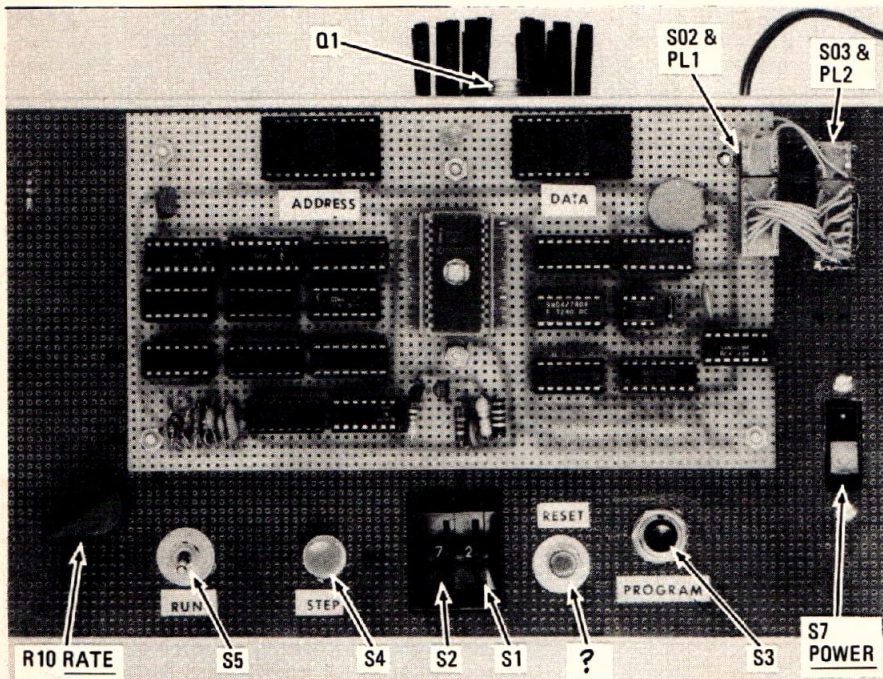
LOGIC/PROGRAMMING BOARD is mounted on standoffs above board holding switches and controls. Heat sink and Q1 are part of power supply.
